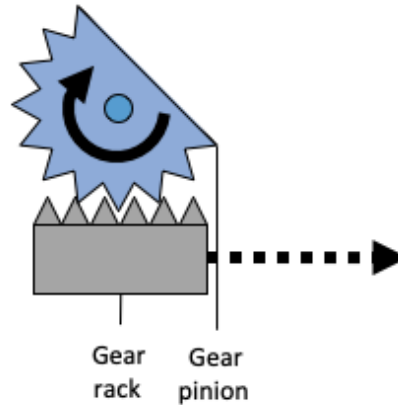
This figure shows a cannula firing mechanism consisting of a gear pinion and rack. The thick-line bordered area was fixed. The gear rack was connected to the cannula and spring. The dotted line was the cannula firing direction.
